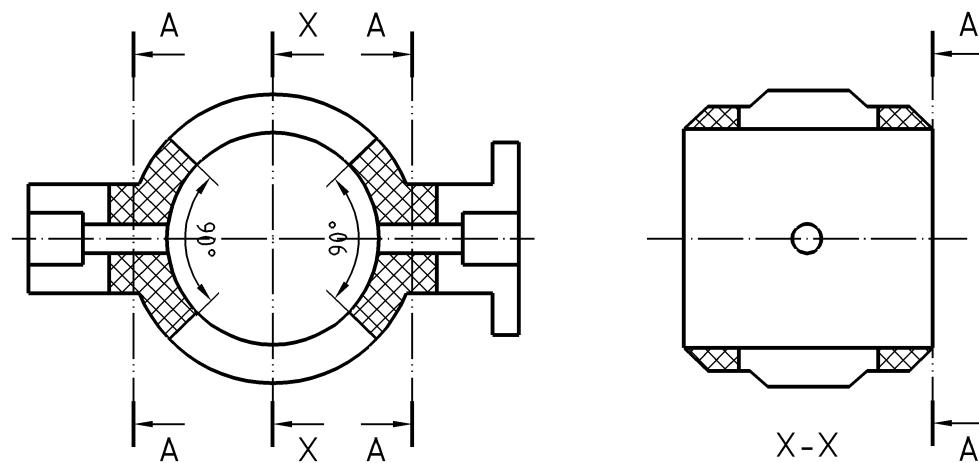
Typical casting section showing required radiographic examination of butterfly valve body
